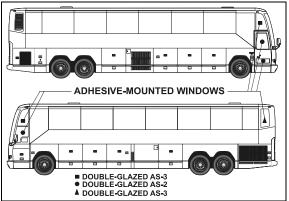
ADHESIVE-MOUNTED WINDOWS
